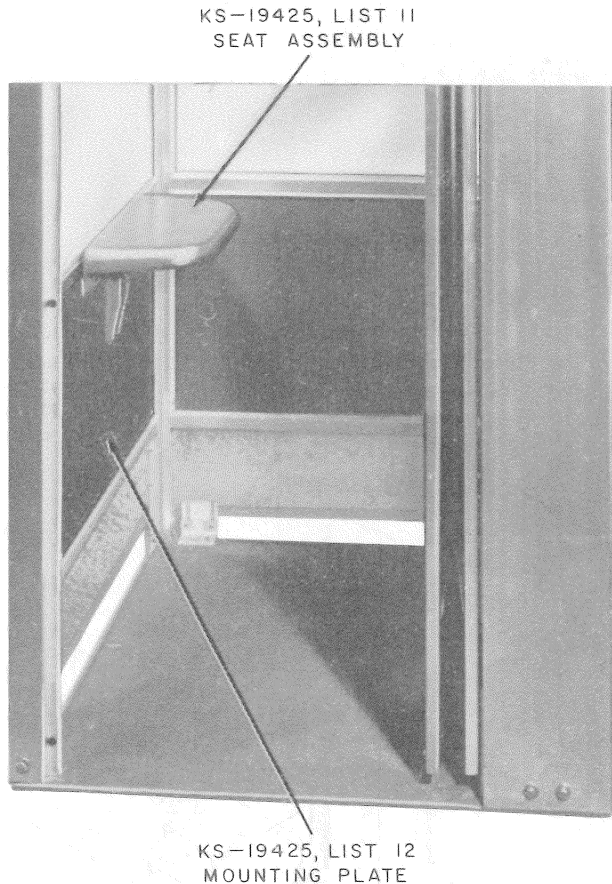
KS-19425, List 11 Seat Assembly with KS-19425, List 12 Mounting Plate
